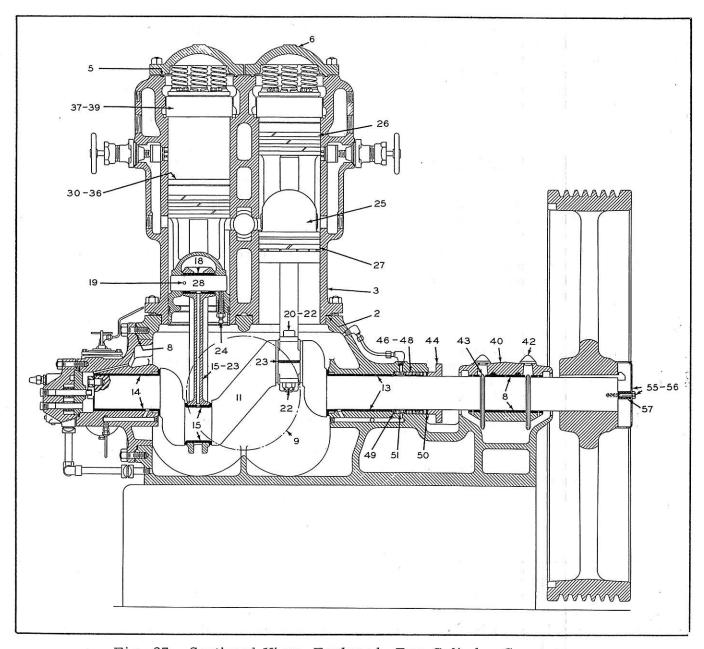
Sectional View, Enclosed, Two Cylinder Compressor
